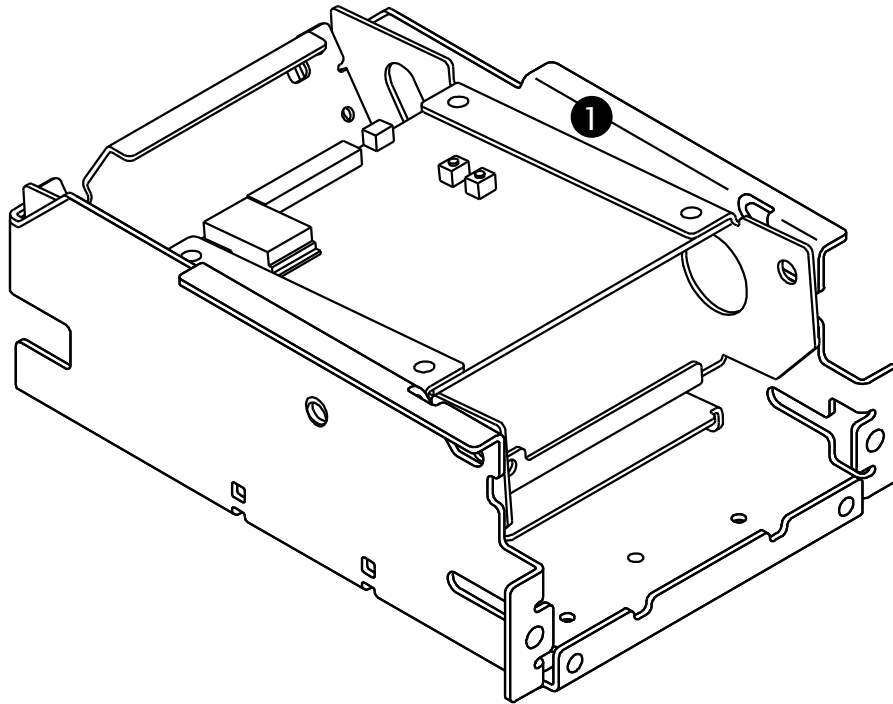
Model 750 “Core” Printer: Main Chassis Assembly
